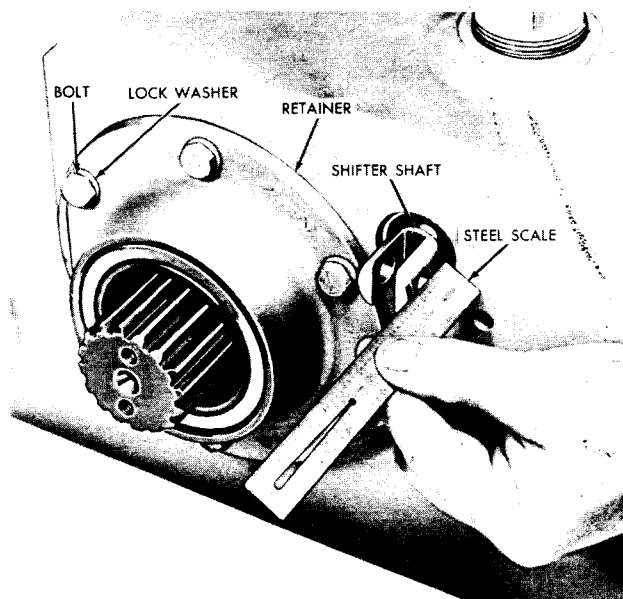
Measuring adjustment of disconnect shaft S2443
